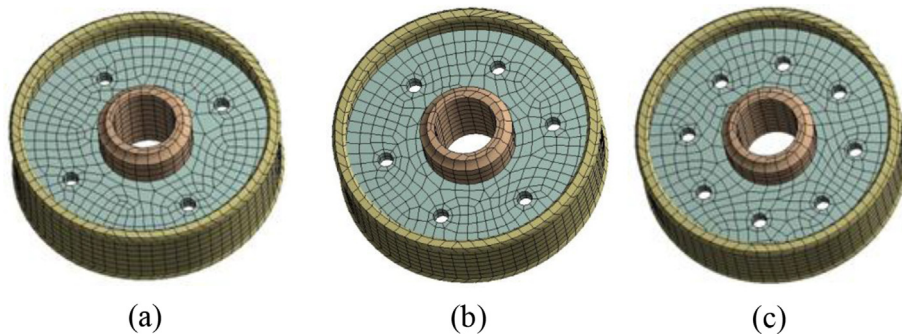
Finite element models of the pulley with (a) 4 bolt holes, (b) 6 bolt holes and (c) 8 bolt holes.
